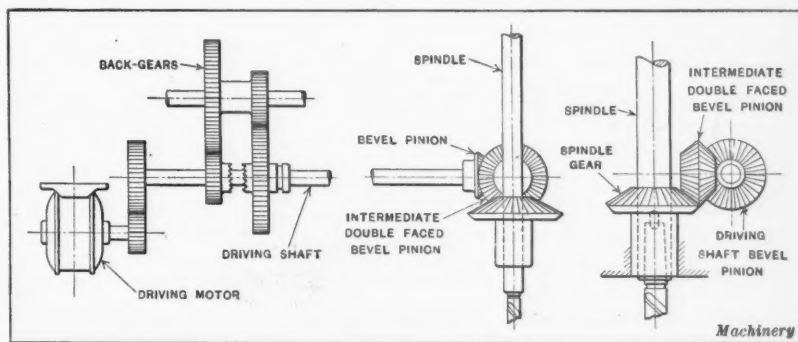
Improved Type of Direct Drive from Motor to Drilling Spindle through Single Horizontal Shaft and Four Gears, in Addition to which there is One Double-faced Bevel Pinion
